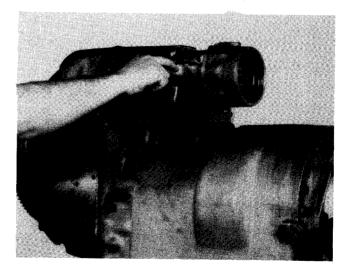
Remove charging pump to pressure regulating valve stud nuts.
